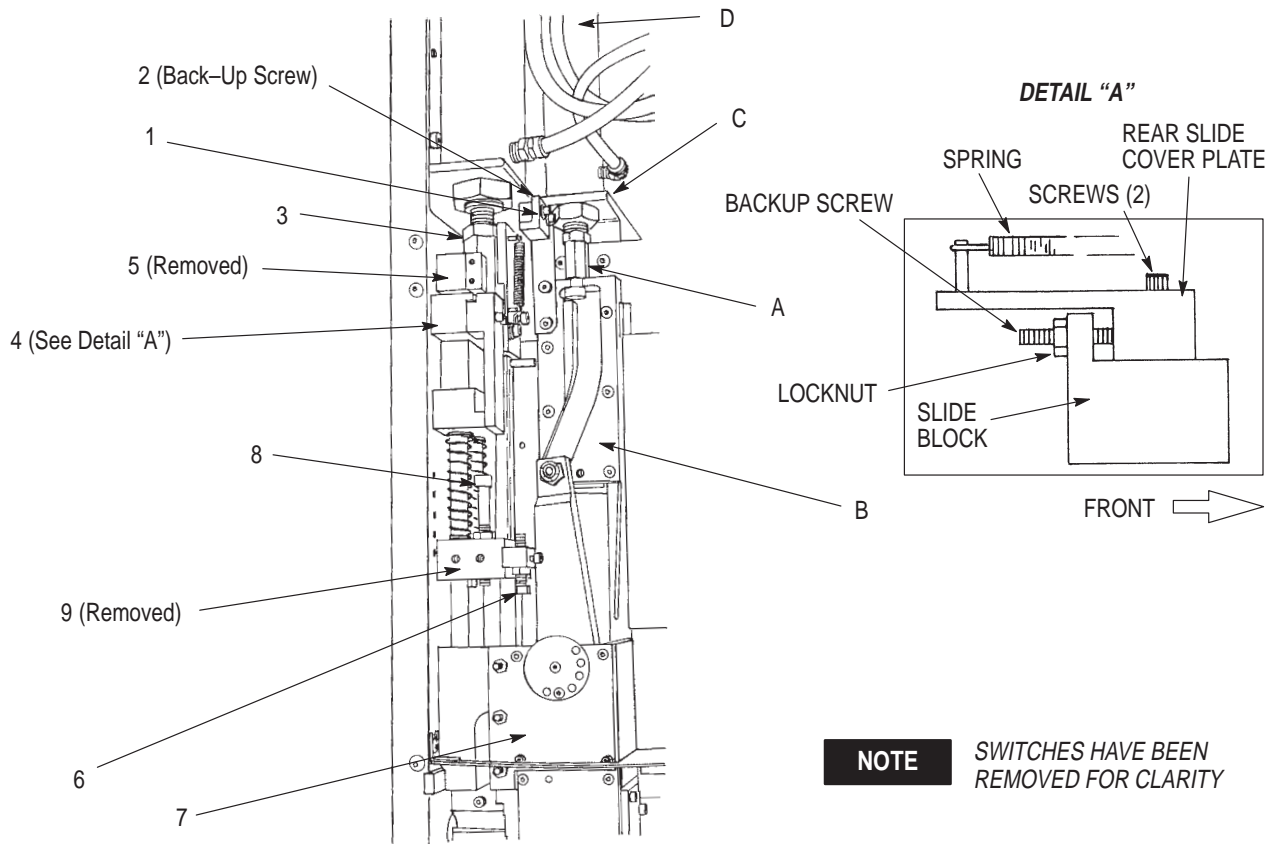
Insertion Tube, Trim Blade, and Inserter Adjustment Locations
